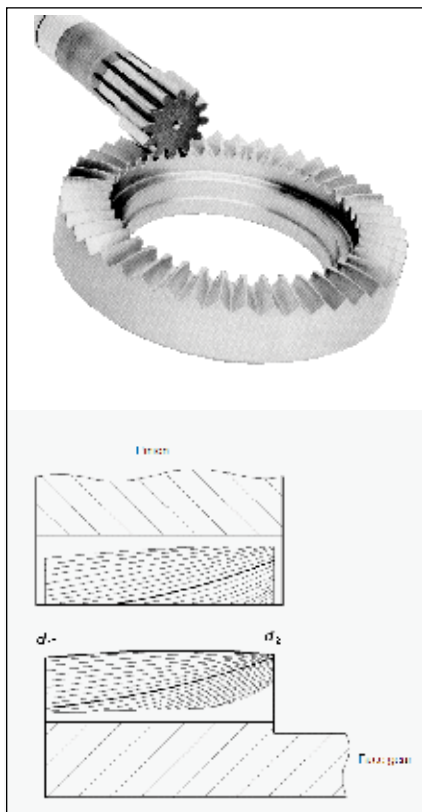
Face gear set (above) and helical contact lines on pinion and face gear.
